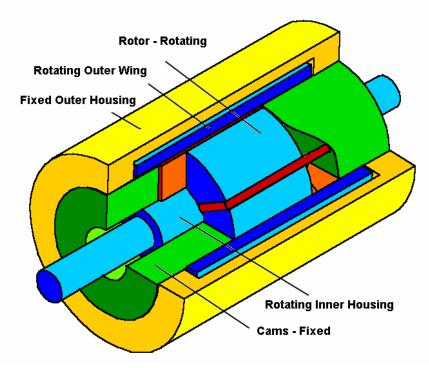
Cutaway of ATI winged rotor axial vane mechanism.
